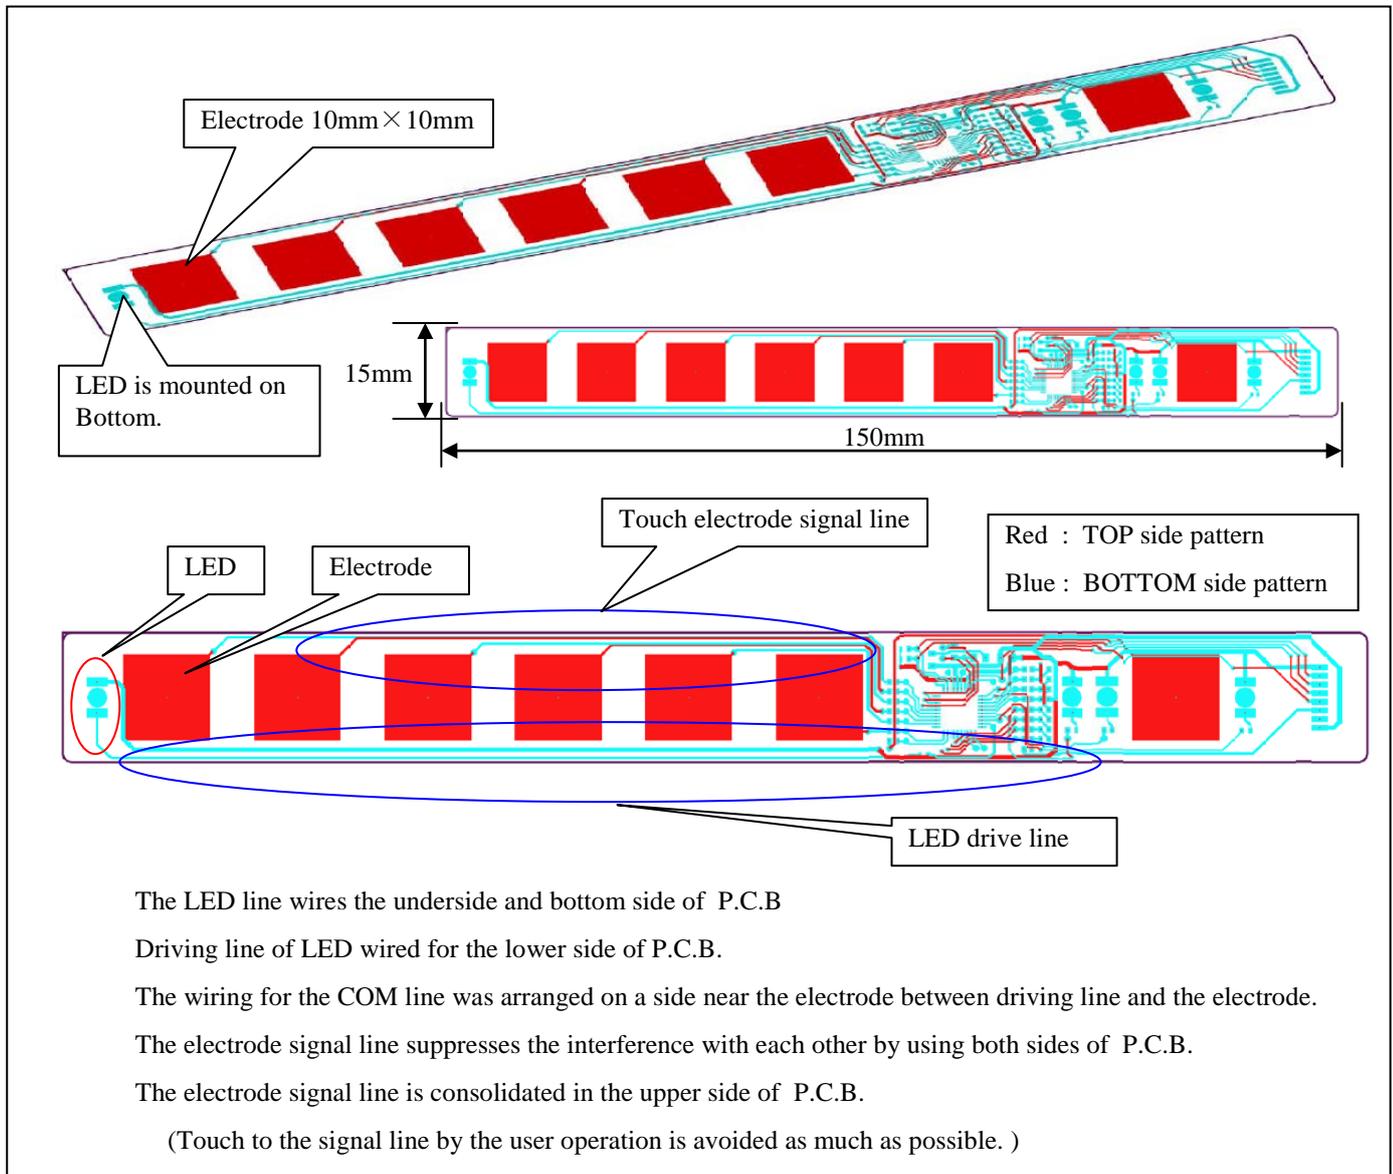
Example of wiring for touch board equipped with PWM drive LED
